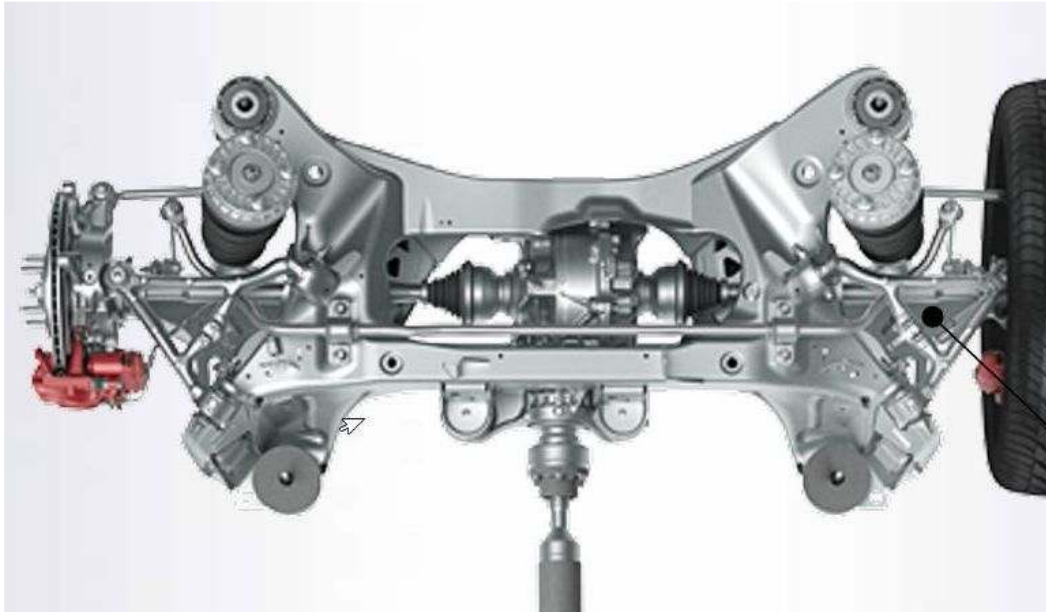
Top down view of F-Type V6 rear suspension assembly with highlights, fuel tanks not shown.
